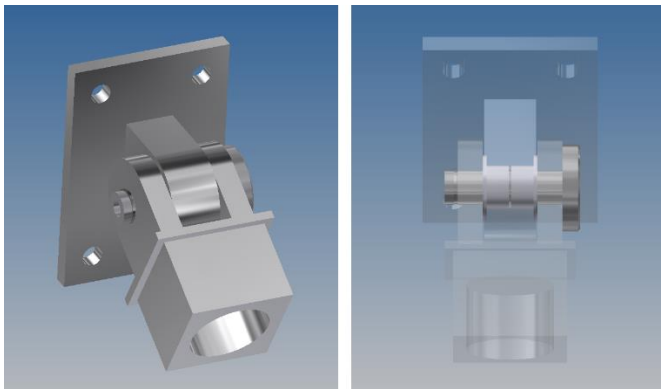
Revolute joint that attaches the linkage to the upright bar.
